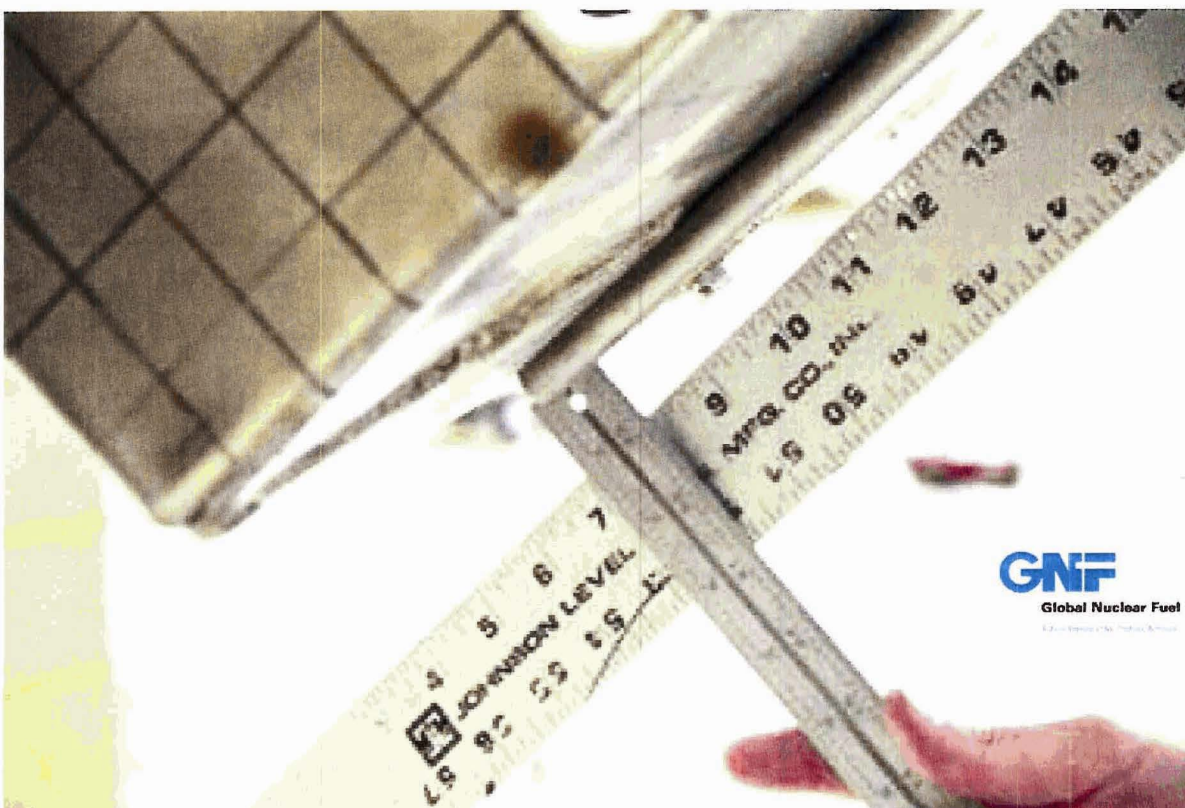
CTU-2 Free Drop Test No. 3; Close-up Profile View of Damage; ~1" Deep
